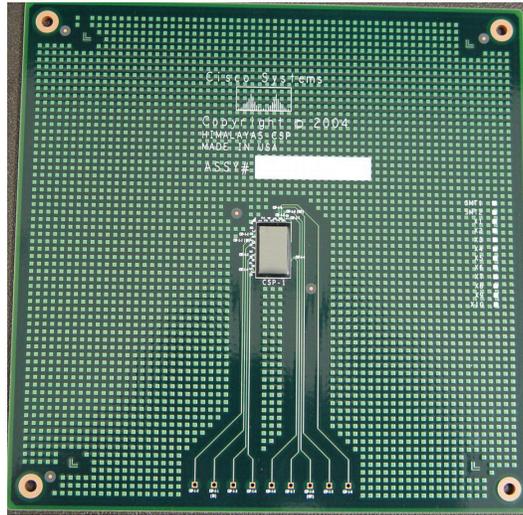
Test Board Assembled with WBG92 for Reliability Testing
